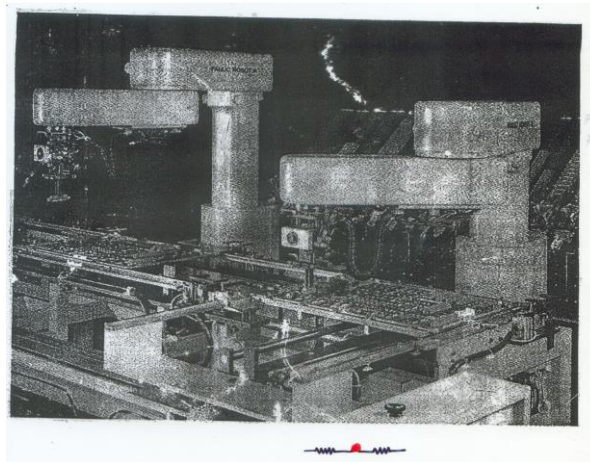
SCARA robot doing an PCB assembly manufacturing operation
